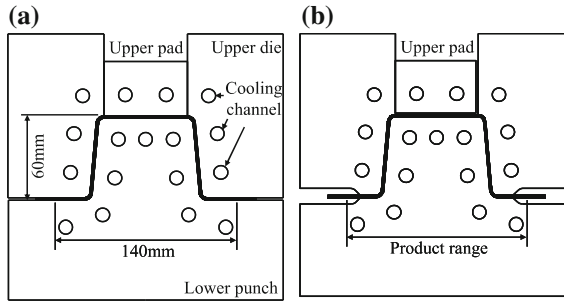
a Conventional hot stamping tool yielding monolithic (uniform) properties, b soft flanges by adjusting tool contact areas [110]
